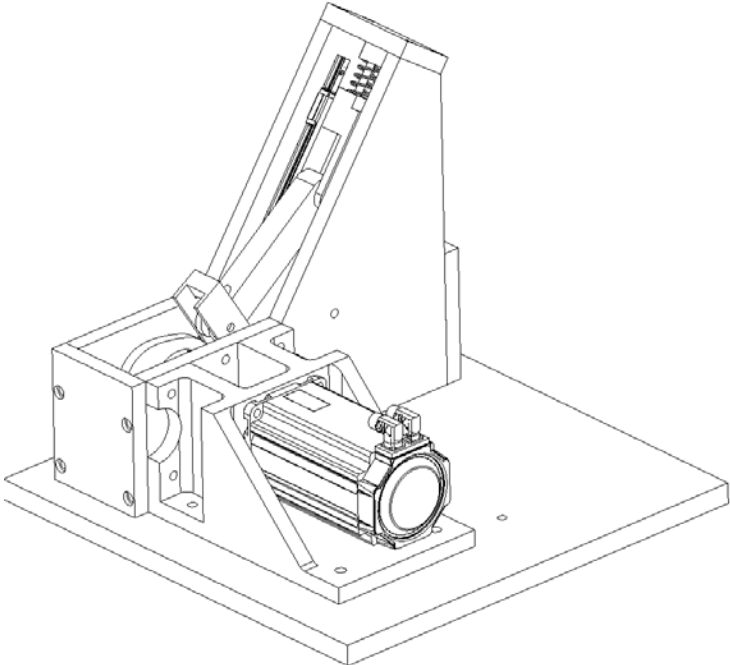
Direct-Drive Cam-Servo Test Machine, Cam Mode
